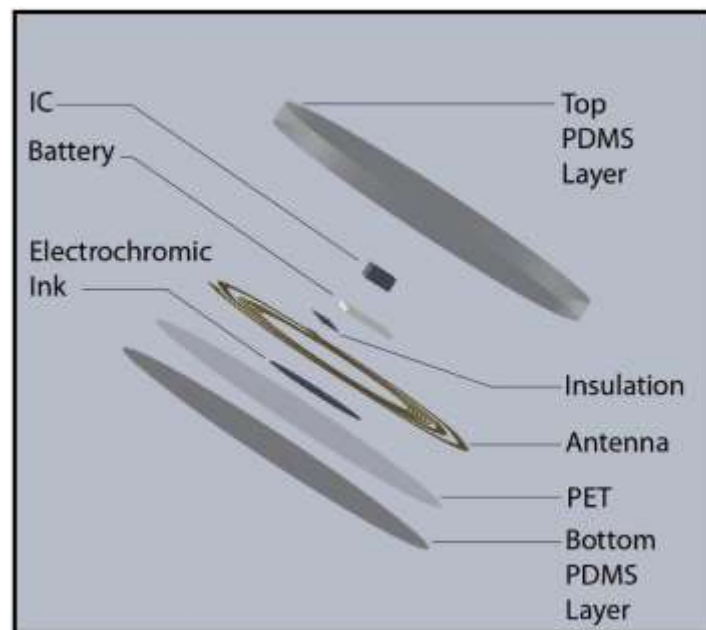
Exploded view of lens highlighting individual layers and components. Wiring has been removed for clarity.
